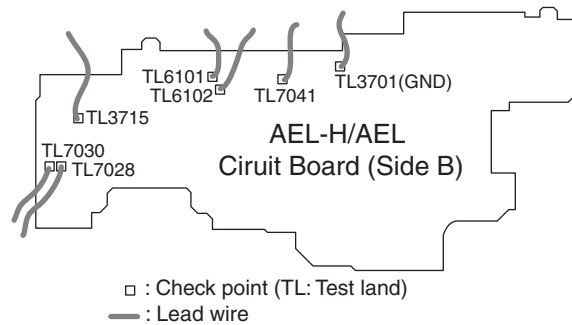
Lead wire soldering of AEL-H/AEL circuit board
